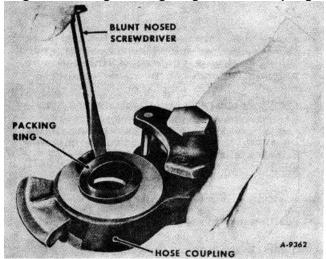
Using Screwdriver to Complete Packing Ring Installation
